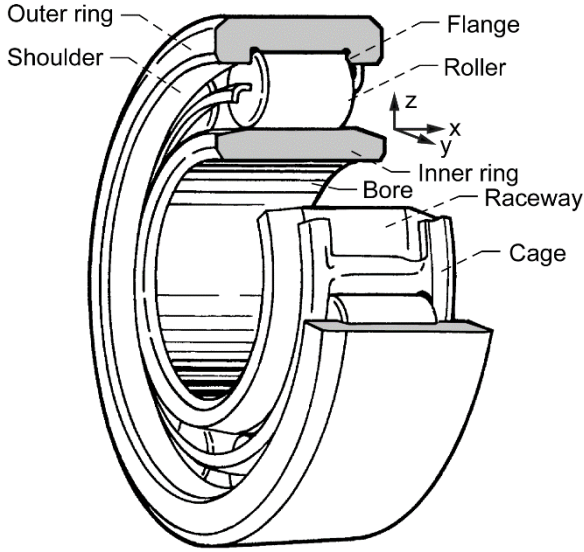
Schematic of cylindrical roller bearing with inner raceway. Bearing accommodates axial movement by not restraining rollers axially on inner raceway. Similar bearing with flanged inner ring allows axial roller movement on outer raceway.
